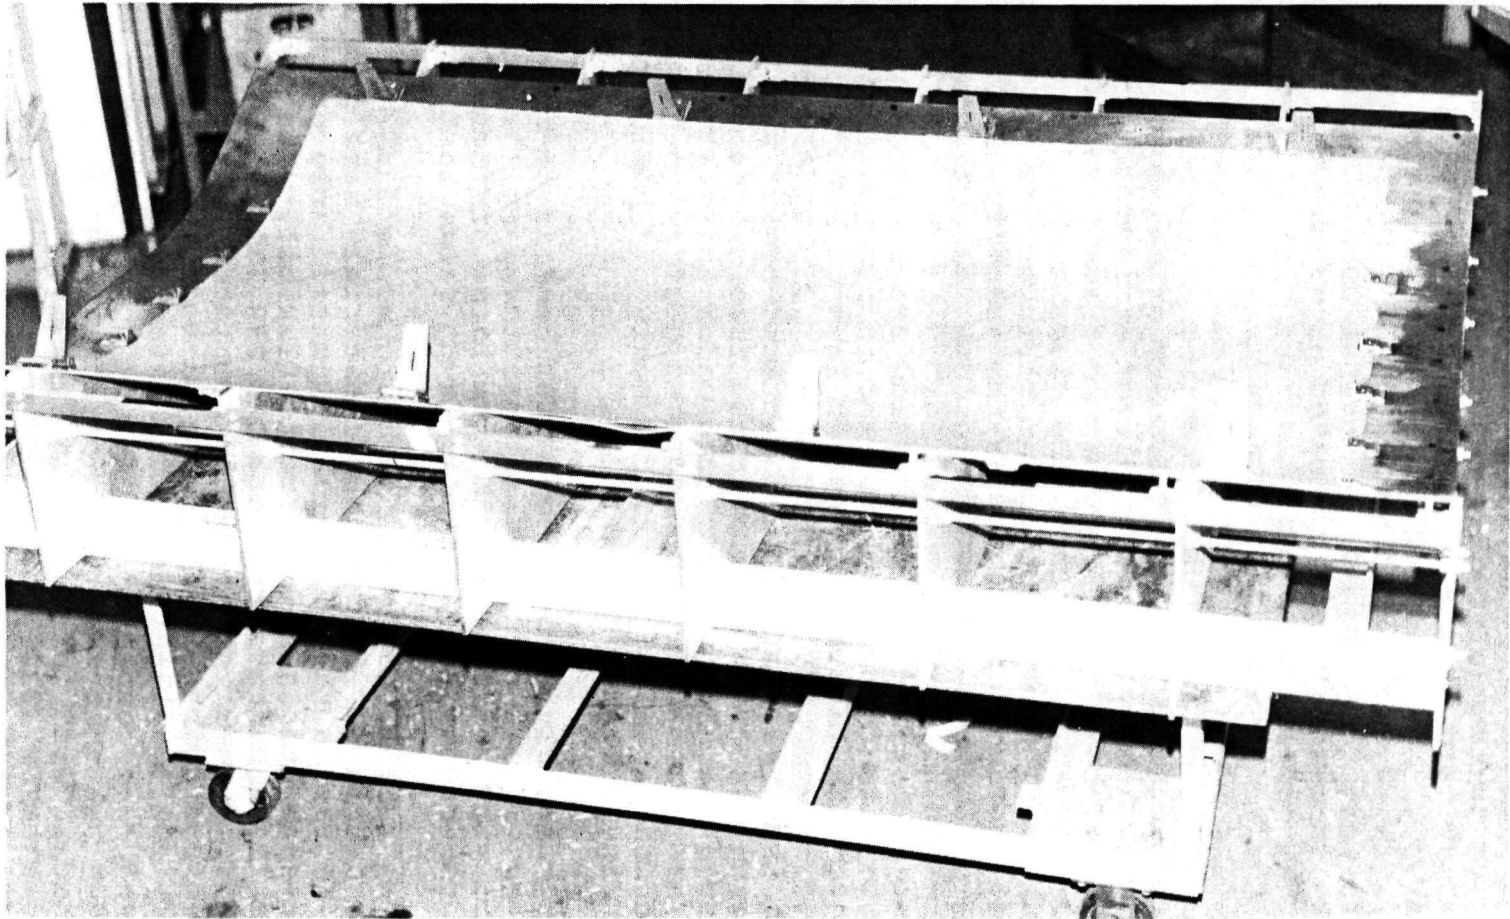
COMPLETED SKIN PLY LAYUP IN EWR 32381-T60 LAYUP TOOL.
